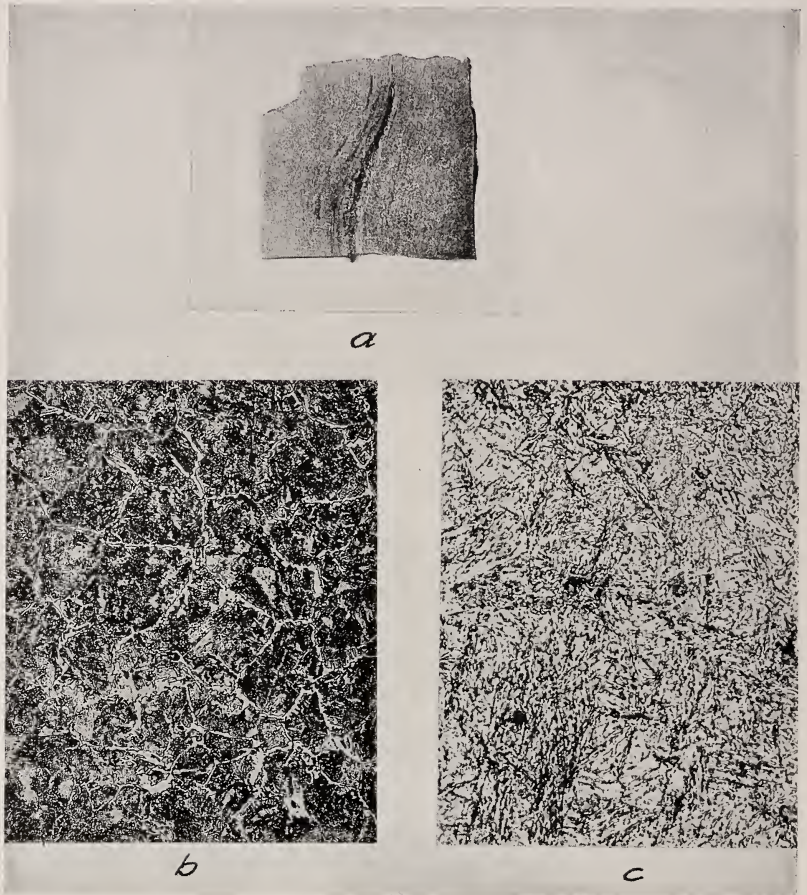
Structure of a defective nickel steel forging caused by improper melting practice
